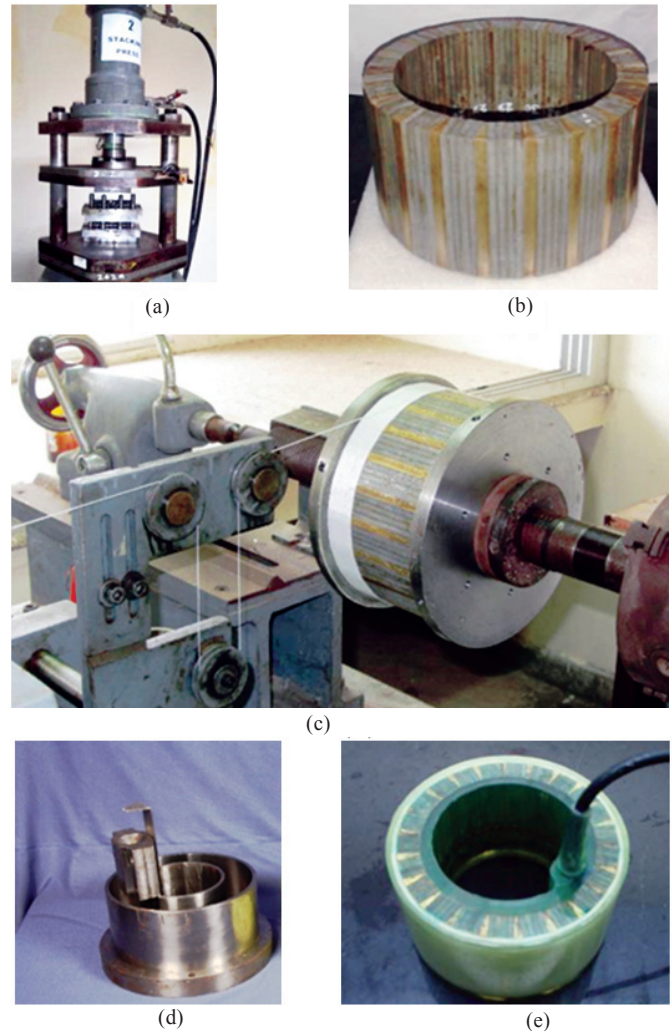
Various stages of transducer manufacture. (a) Piezoceramic stacking under hydraulic load (b) Assembled cylinder (c) Fibre winding (d) PU moulding tool (e) PU moulded transducer.
